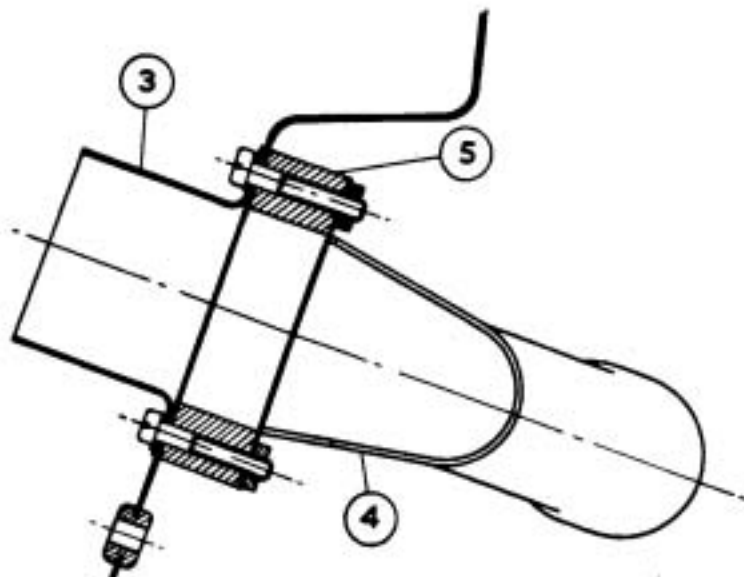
FITTING OF SUPPORT TUBE, BREECHES PIECE AND THROTTLE BARREL.
